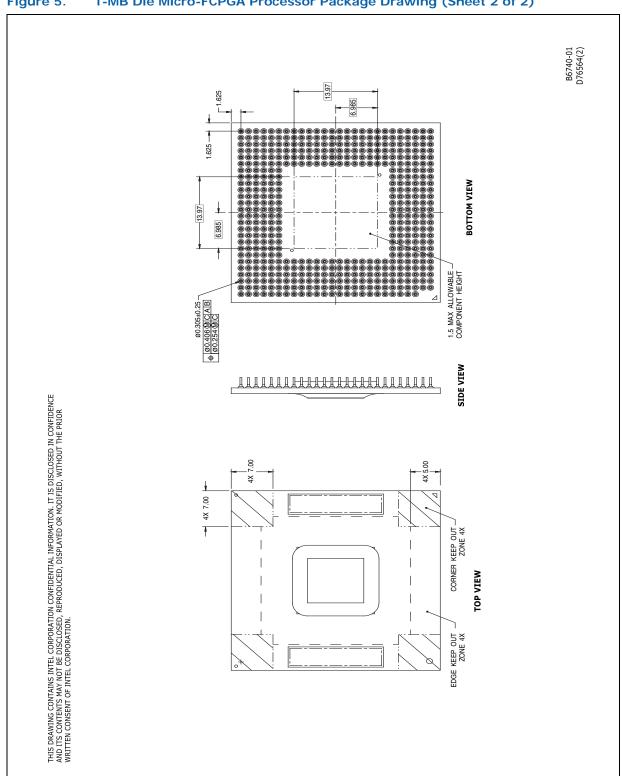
1-MB Die Micro-FCPGA Processor Package Drawing (Sheet 2 of 2)
